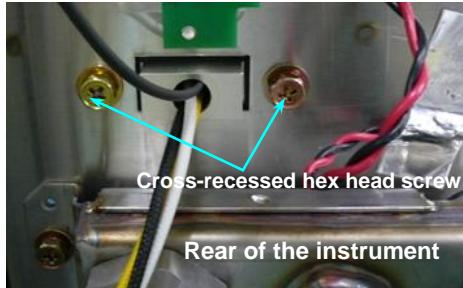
Removal of xylene heat plate unit (1)
